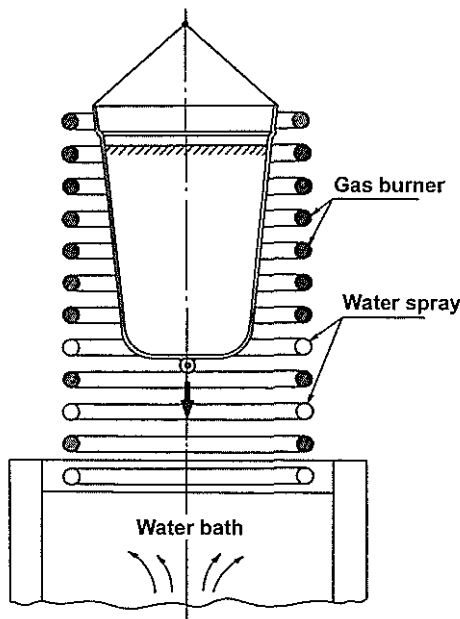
Casting Mould with controlling cooling rate by gas burner and water spray¹⁾
